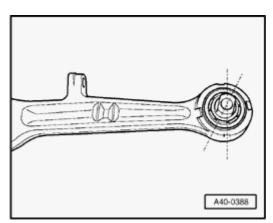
Inner Bushing, Removing Courtesy of VOLKSWAGEN UNITED STATES, INC.
